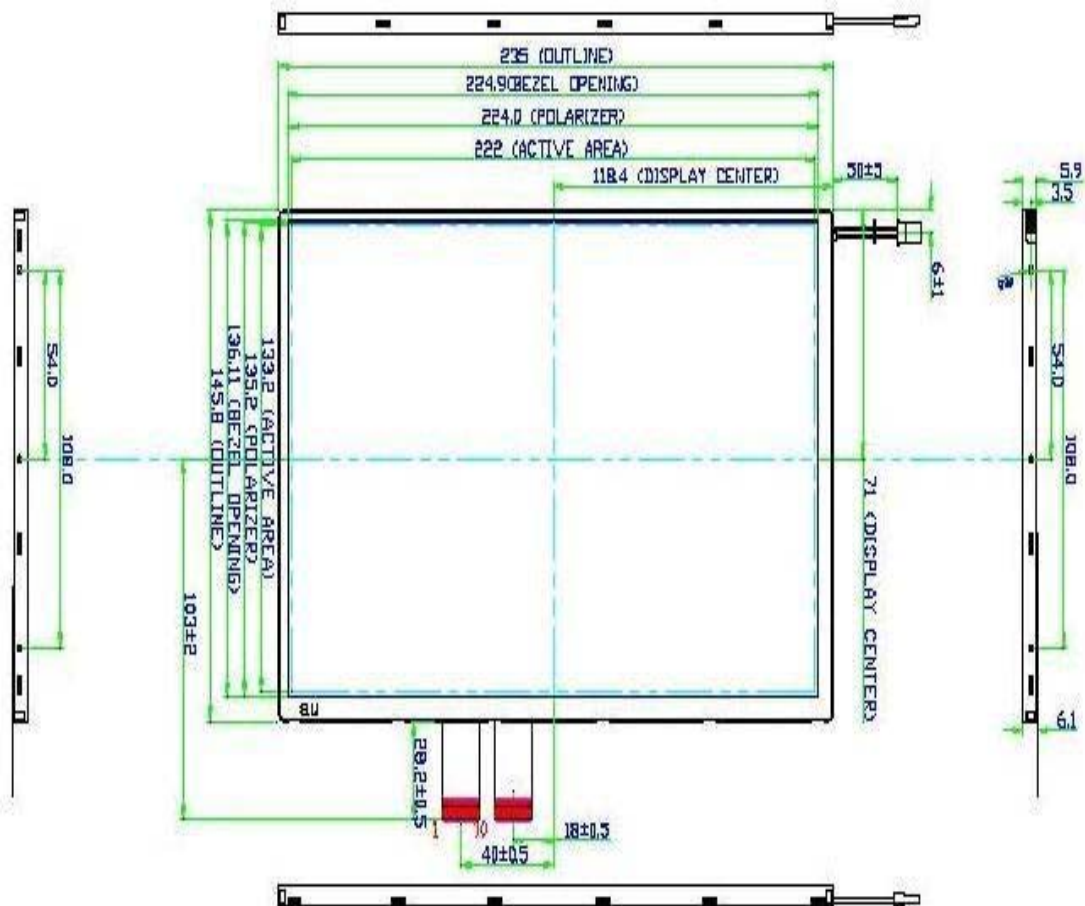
Outline dimension of TFT-LCD module (Front Side)
